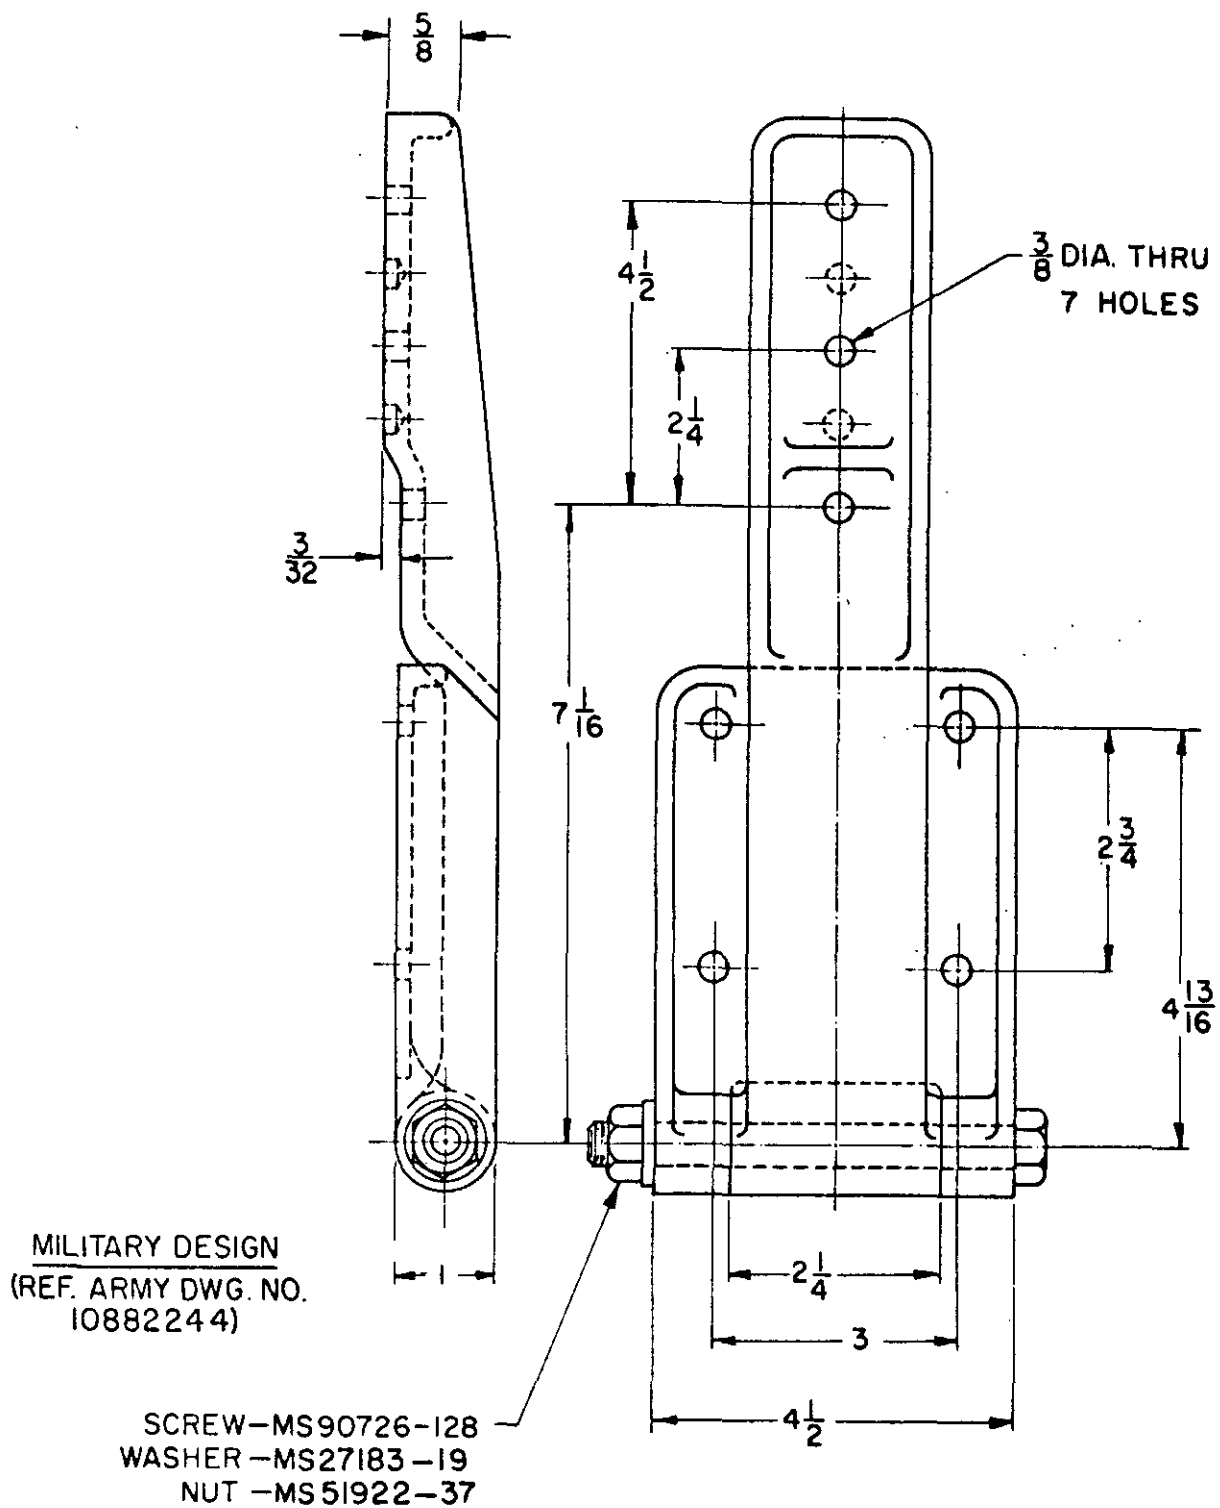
HINGE, DOOR, VAN — FLAT MOUNTING.
